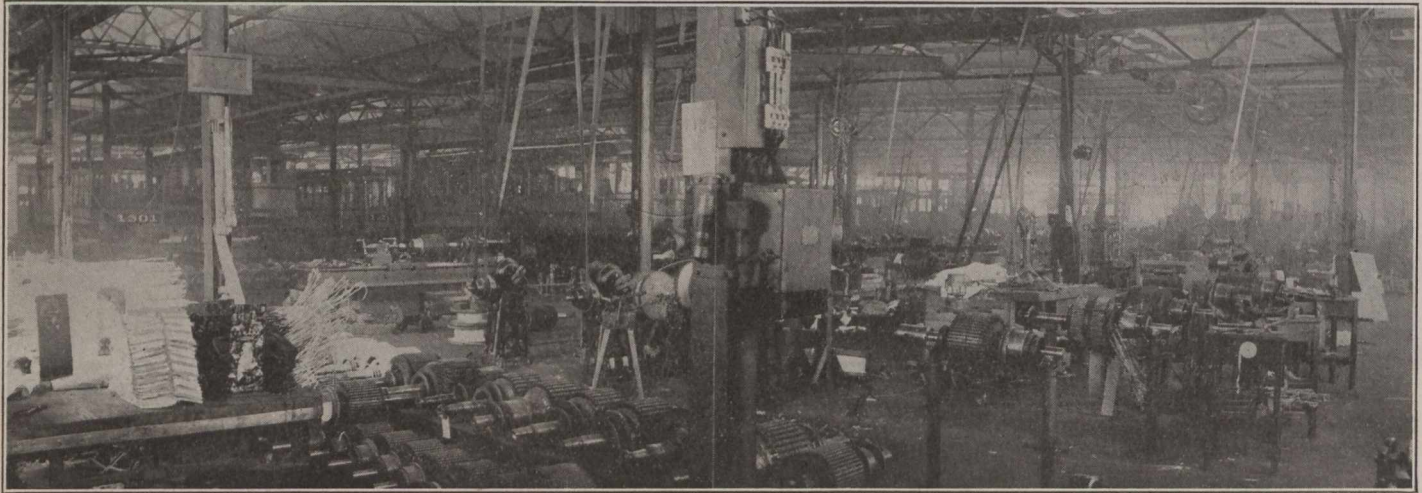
Interior View of Main Building, showing Armature Shop, with Machine Shop and Overhauling Space in Background.
